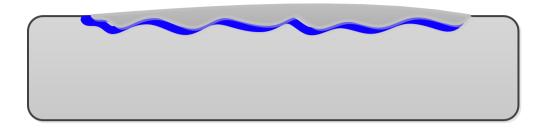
Additional filler added to fill the pits. Do not bridge them.
